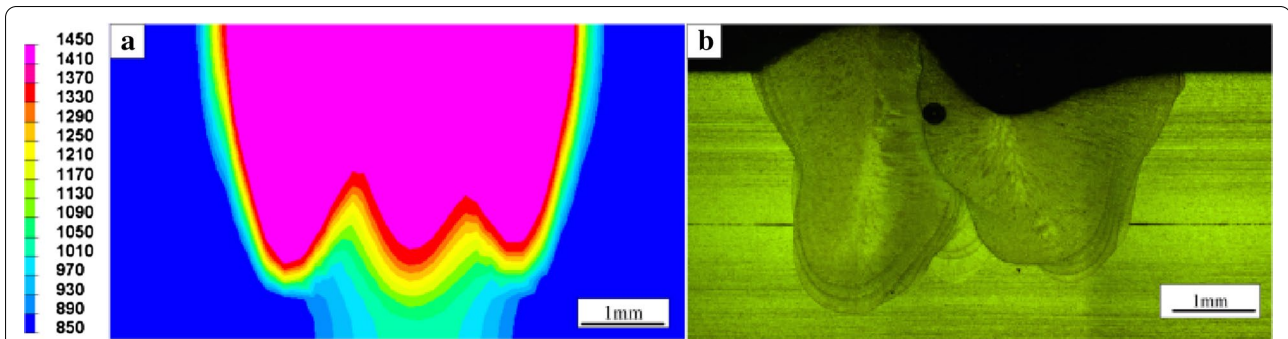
Welding method is 4-sections of joint morphology: a Numerical simulation of molten pool morphology; b Actual welded joint morphology
